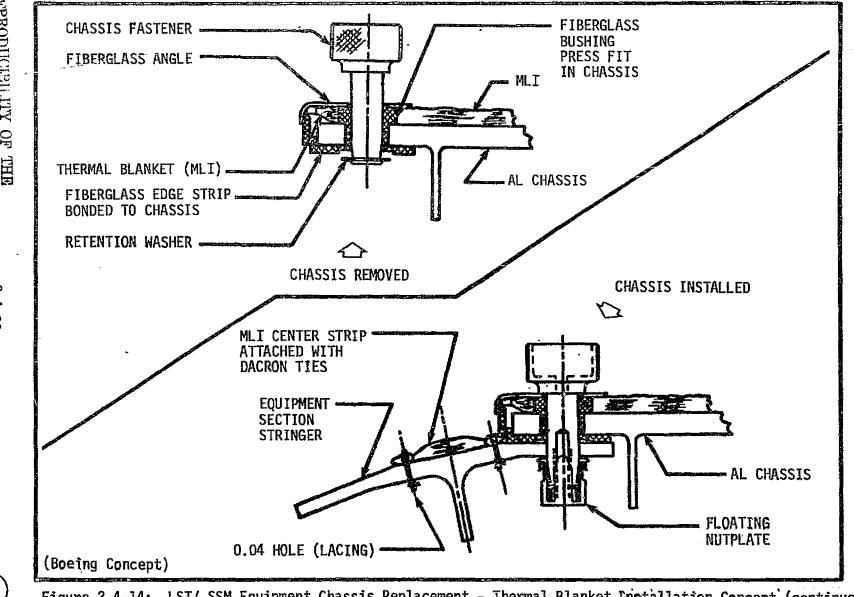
LST/ SSM Equipment Chassis Replacement - Thermal Blanket Installation Concept (continued)
